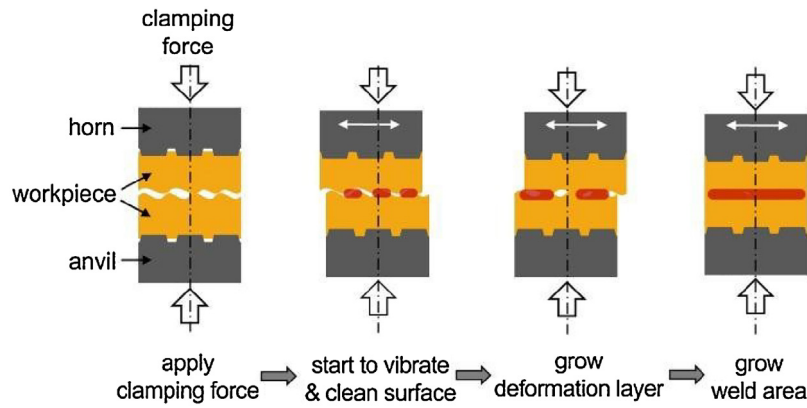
An illustration of ultrasonic welding process [2].
